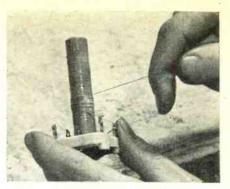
Photograph shows method of winding i.f.'s on old coil forms. complete coil specifications see Table 1.
